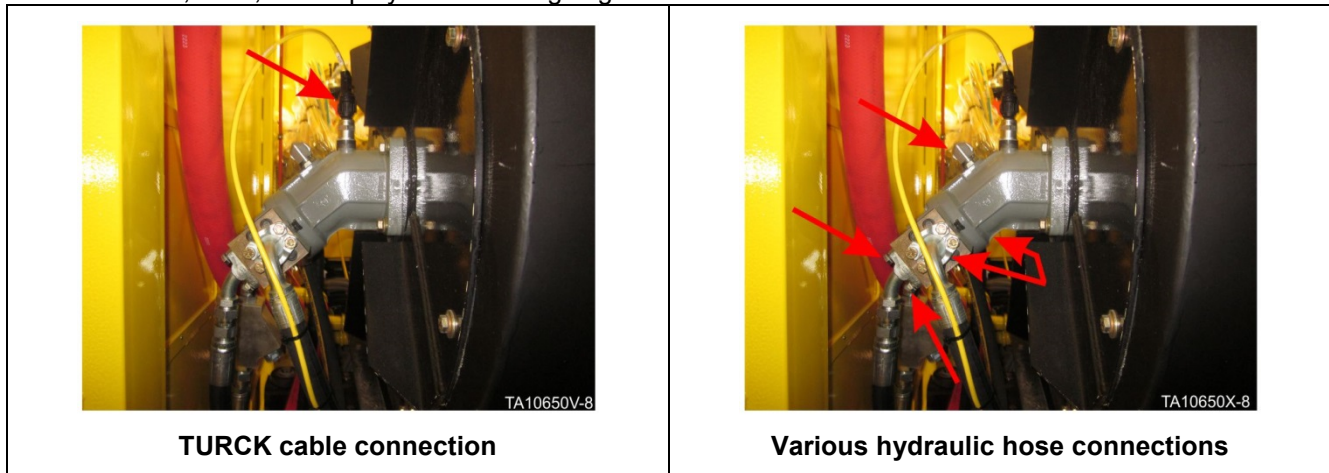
Hydraulic hose connections and electrical TURCK cable to cooling air blower
